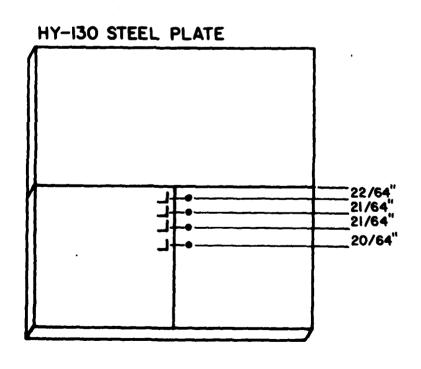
THERMOCOUPLE AND STRAIN GAGE LOCATIONS ON EB WELDED SPECIMENS
